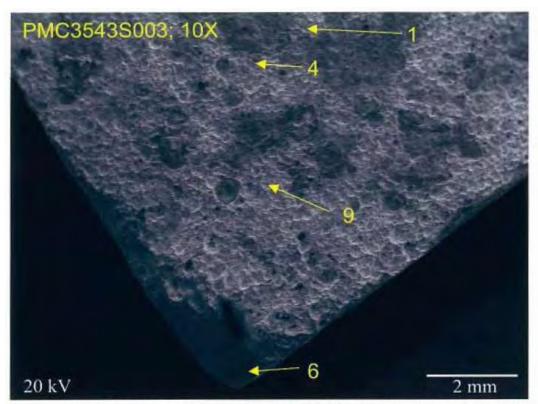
S.E.M photo of eye bar fracture surface at fracture origin. 10X.
